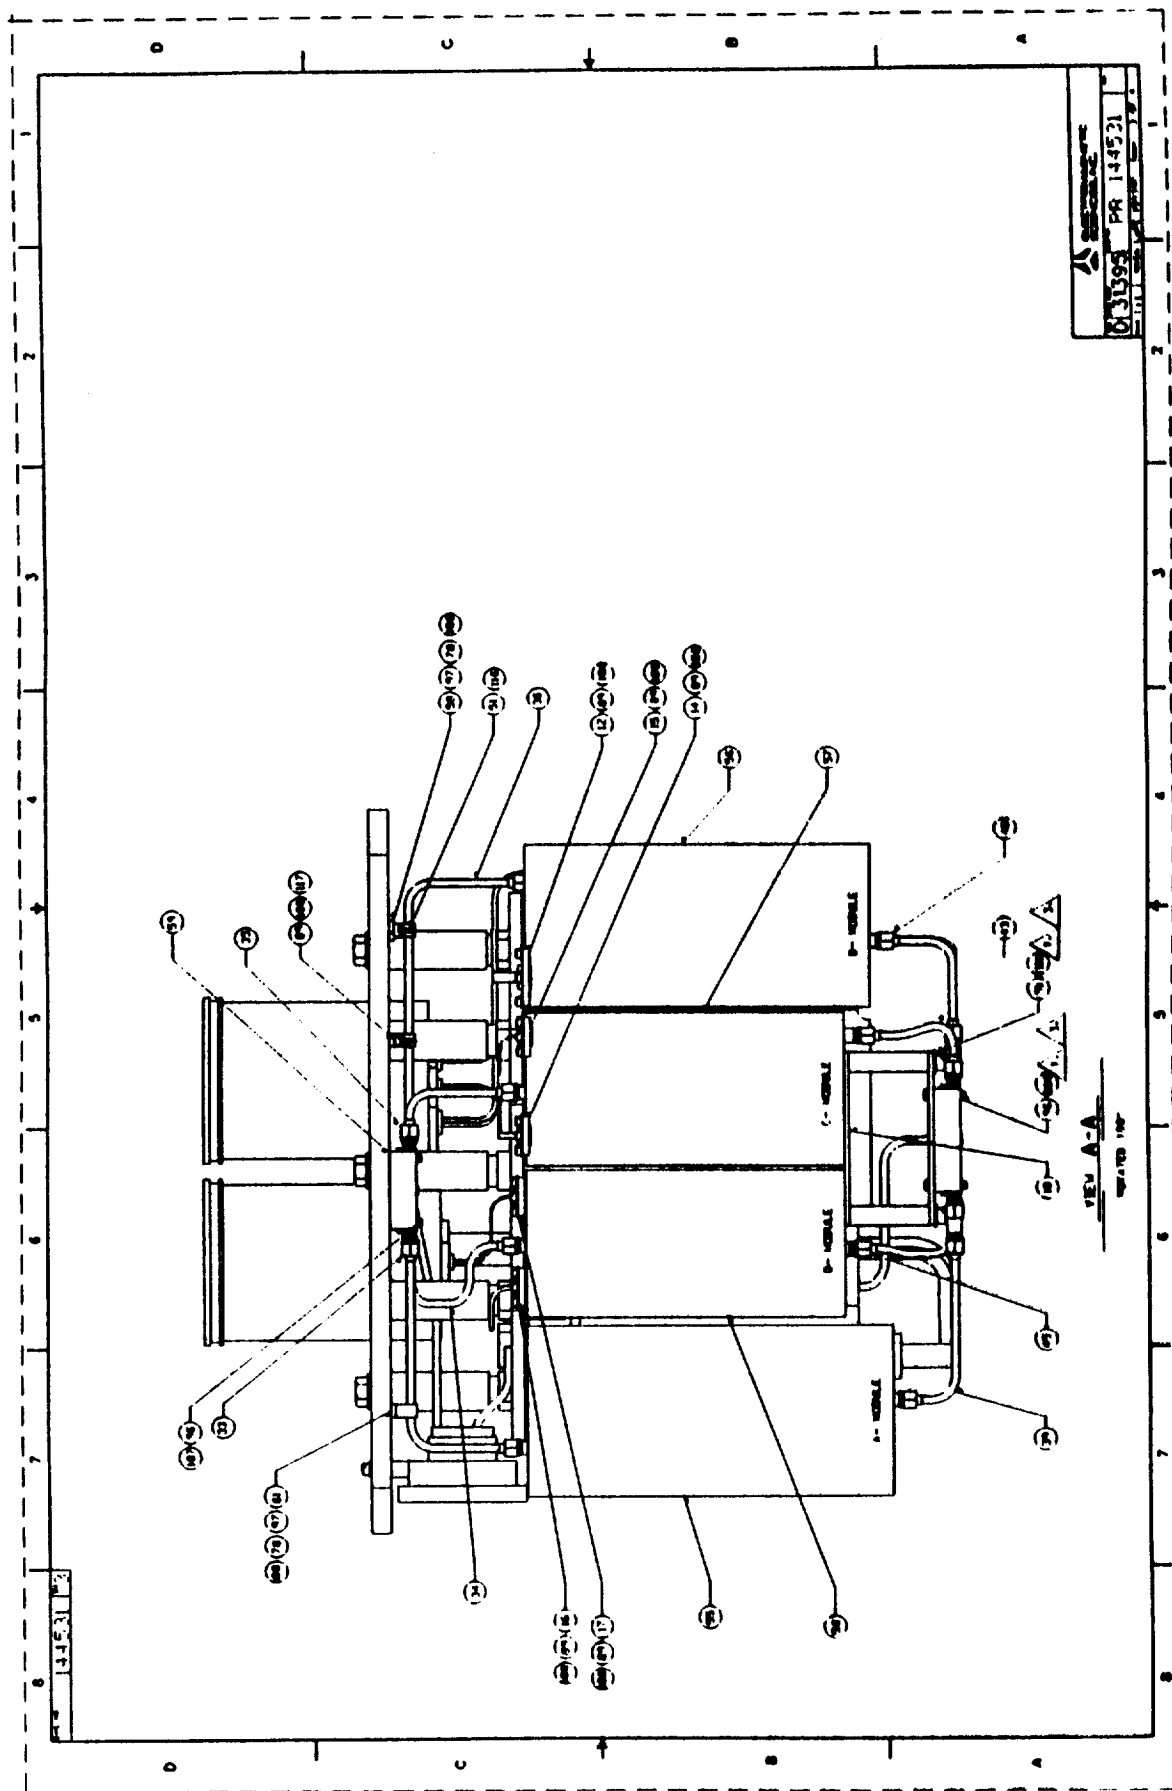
(c). Diagram of Transmit/Receive Assembly Showing Plan Sectional View of T/R Modules
